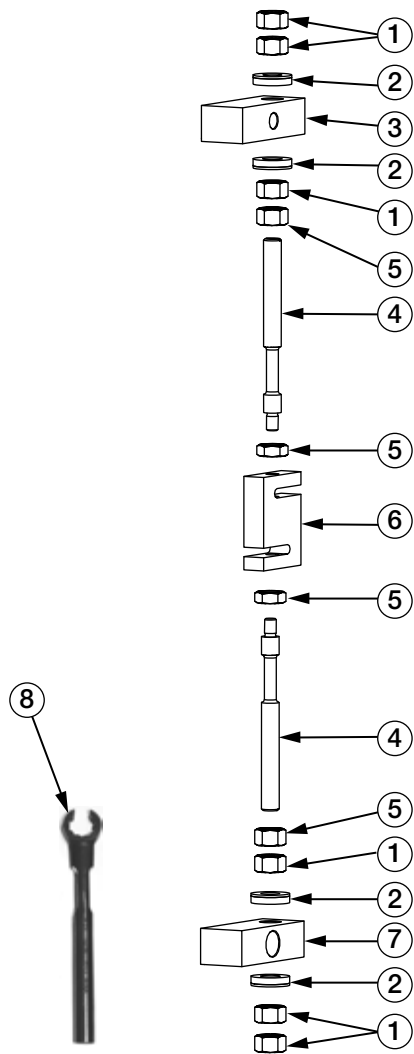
Load Cell Replacement Kit Parts Illustration
